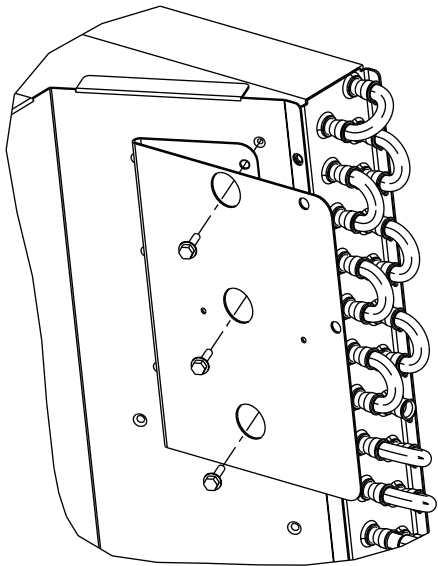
A - MOUNTING CONTROL BOARD SIDE DISCHARGE (AC)
